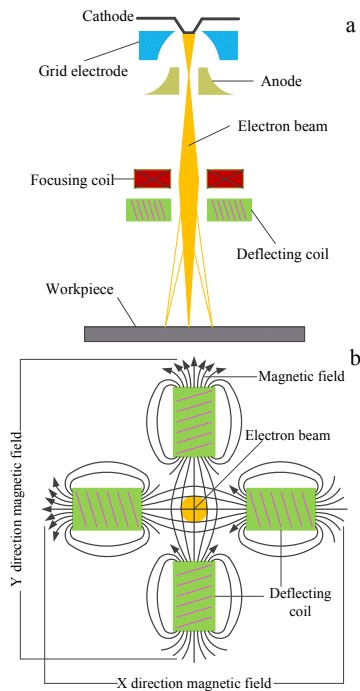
Producing mechanism of multiple electron beams in EBW: (a) configuration of electronic gun in EBW machine and (b) the deflecting system of EBW machine
